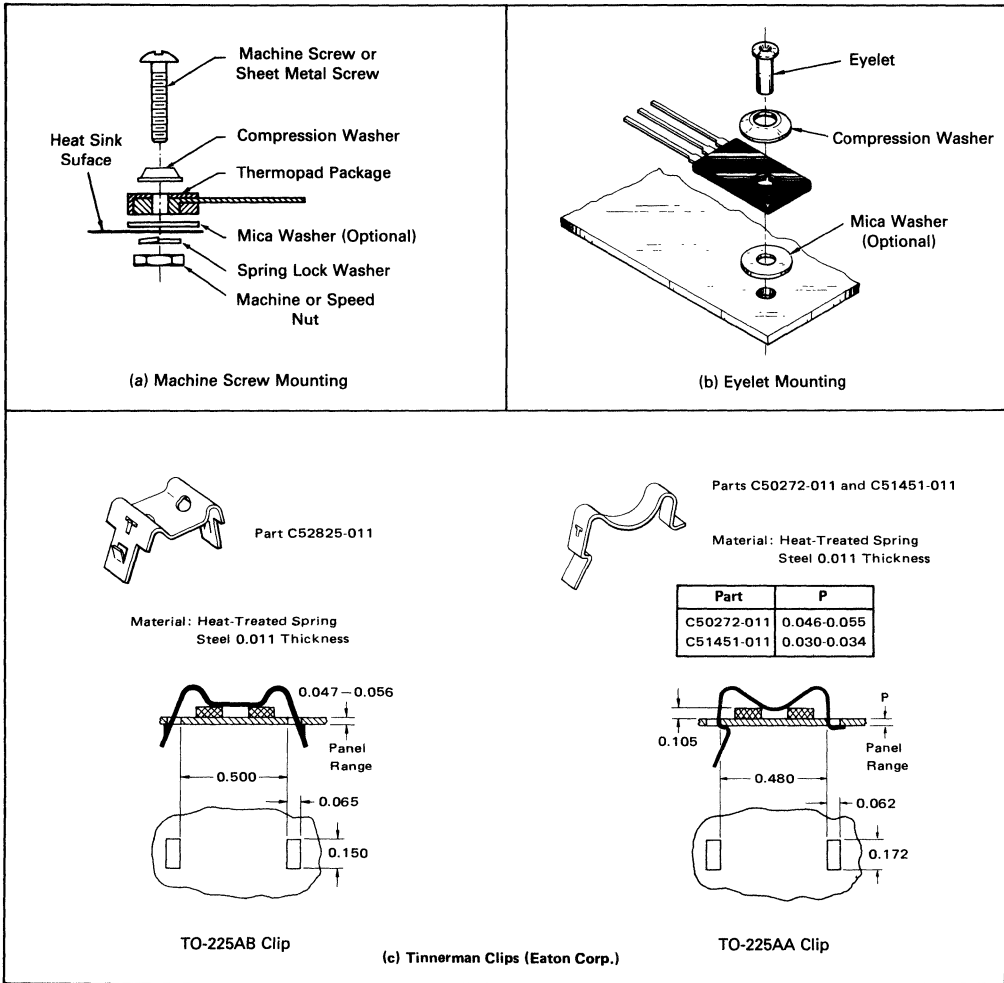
RECOMMENDED MOUNTING ARRANGEMENTS FOR TO-225AA (TO-126)
